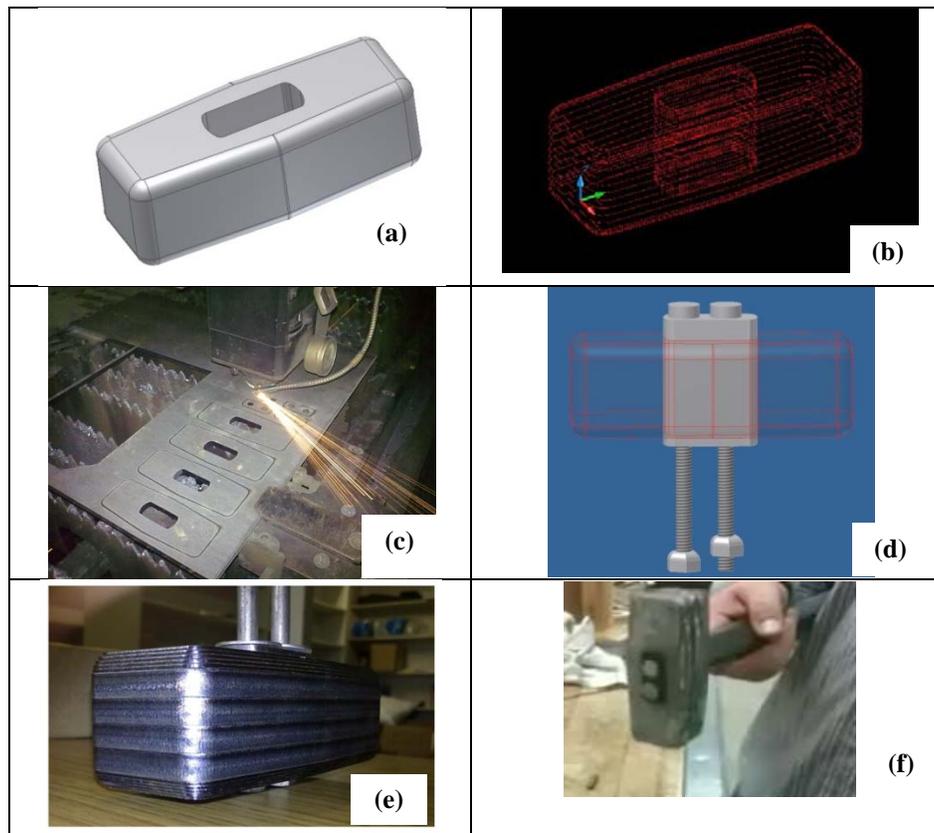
General steps for the fully dense freeform fabrication (FDFF) method for a demolition hammer head: 3D solid modeling (a), adaptive slicing (b), abrasive waterjet cutting or laser cutting (c), alignment tooling design (d), bonding layers (e), and final product test (f).
